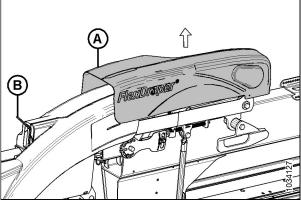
Wing Lock Spring Handle in Locked Position - Left Side Shown
